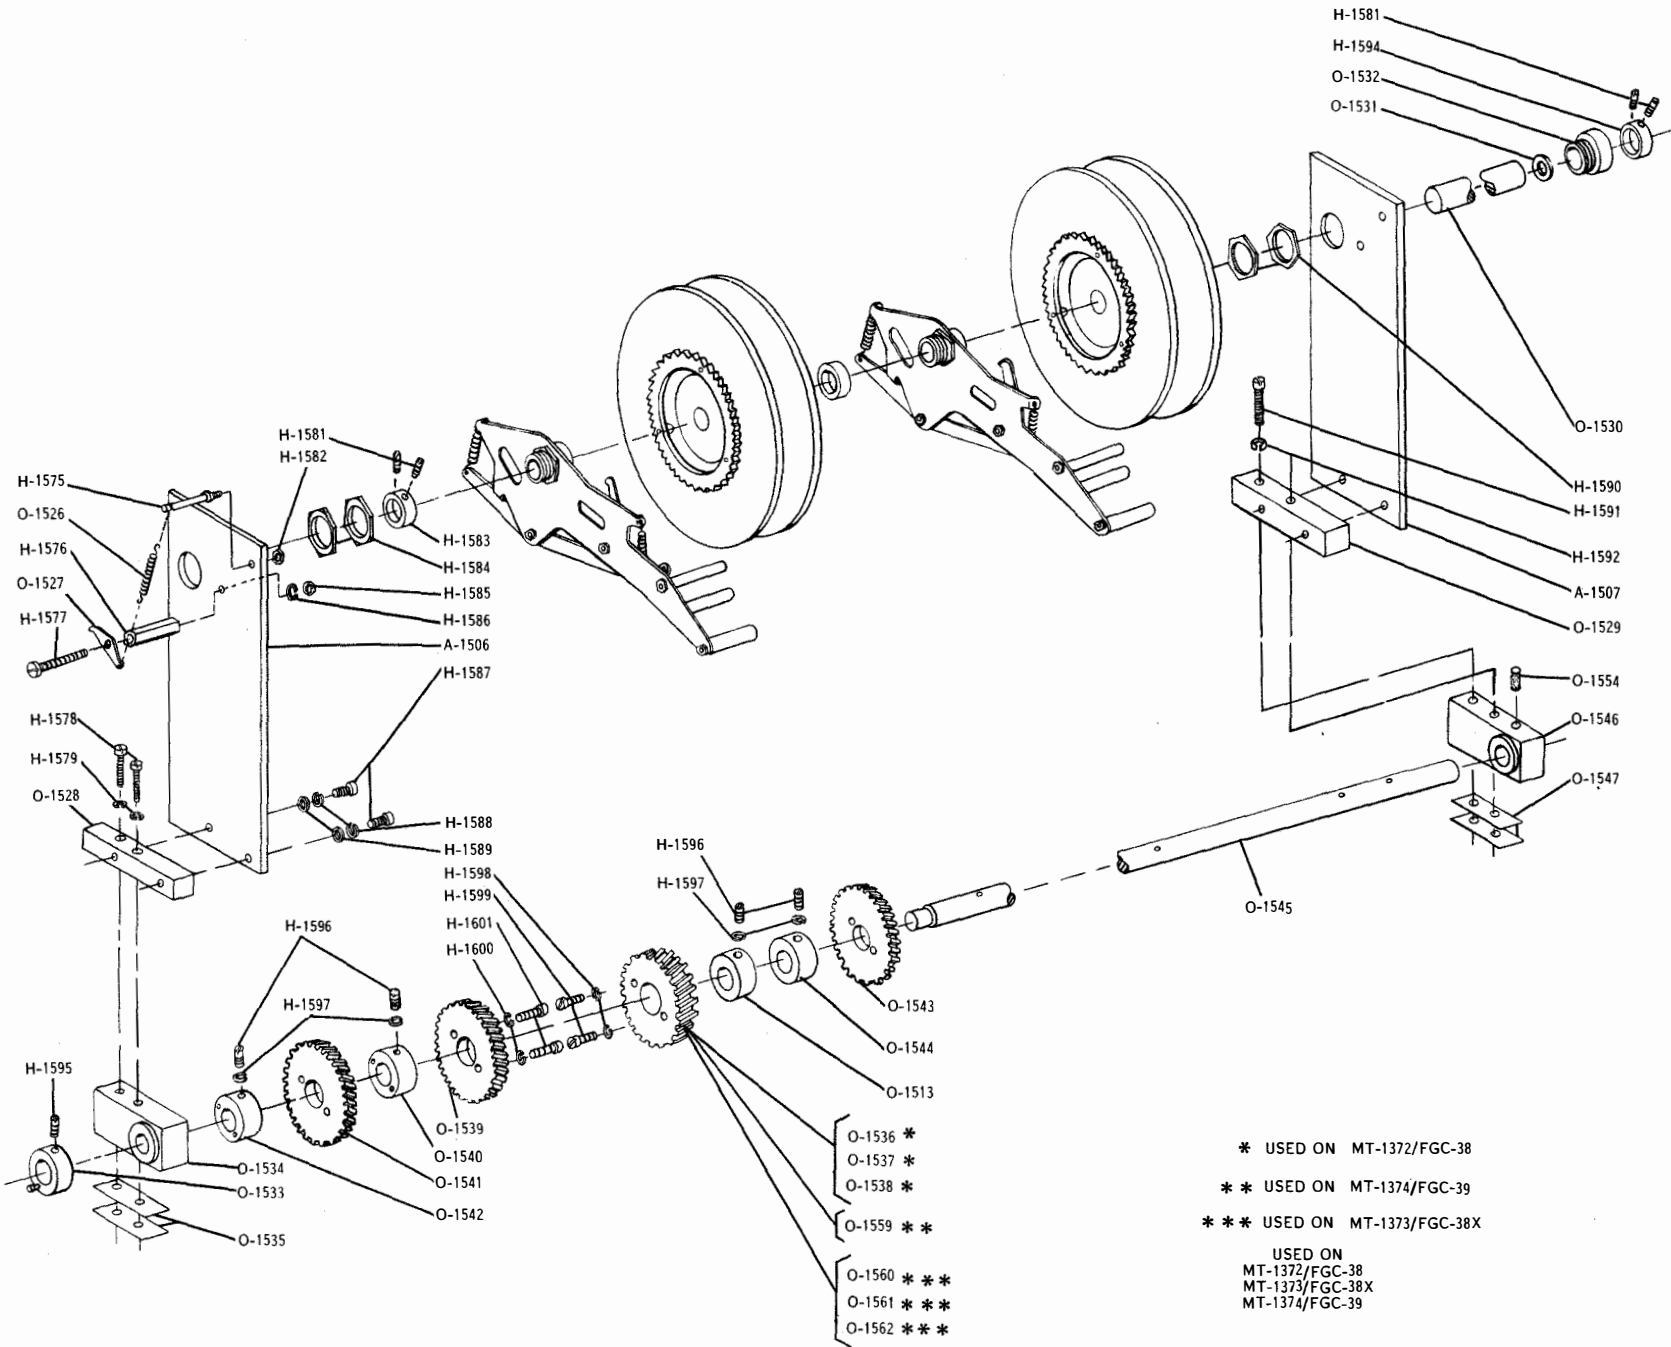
Numbering Base Take-up Reels and Drive Shaft Assembly
